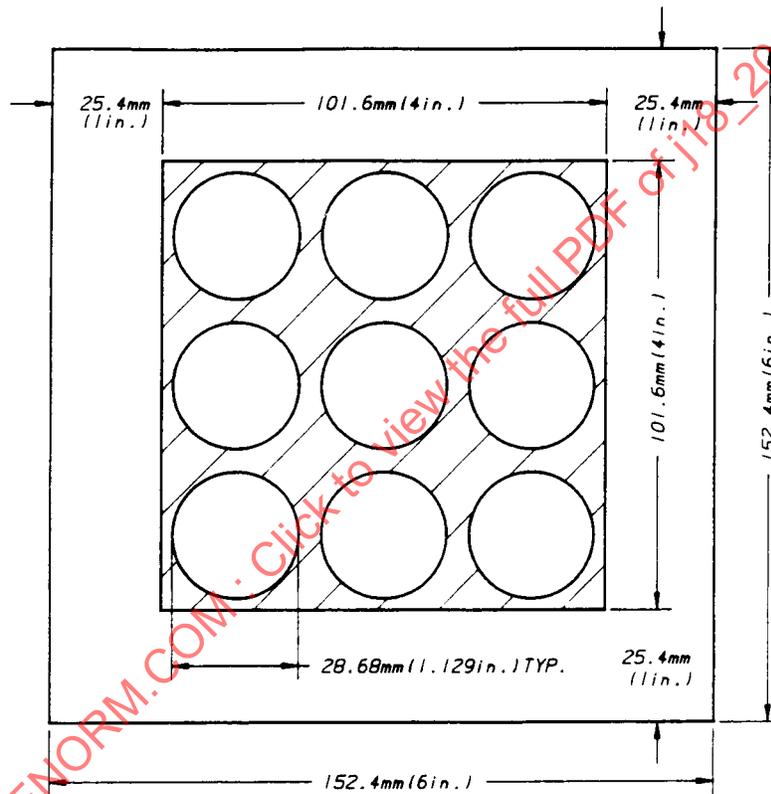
LOCATION FROM WHICH STANDARD TEST SPECIMENS ARE TO BE CUT WHEN TESTING STANDARD TEST SLABS OR COMMERCIAL FLAT SHEETS
